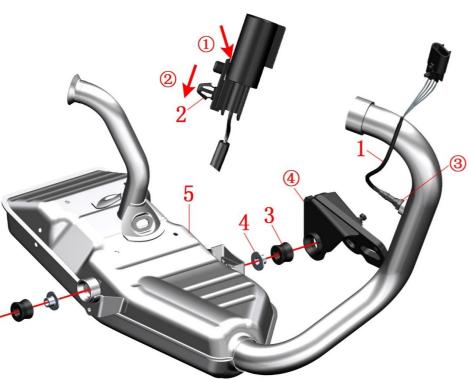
MUFFLER		Muffler front assembly 2	CHK	0
